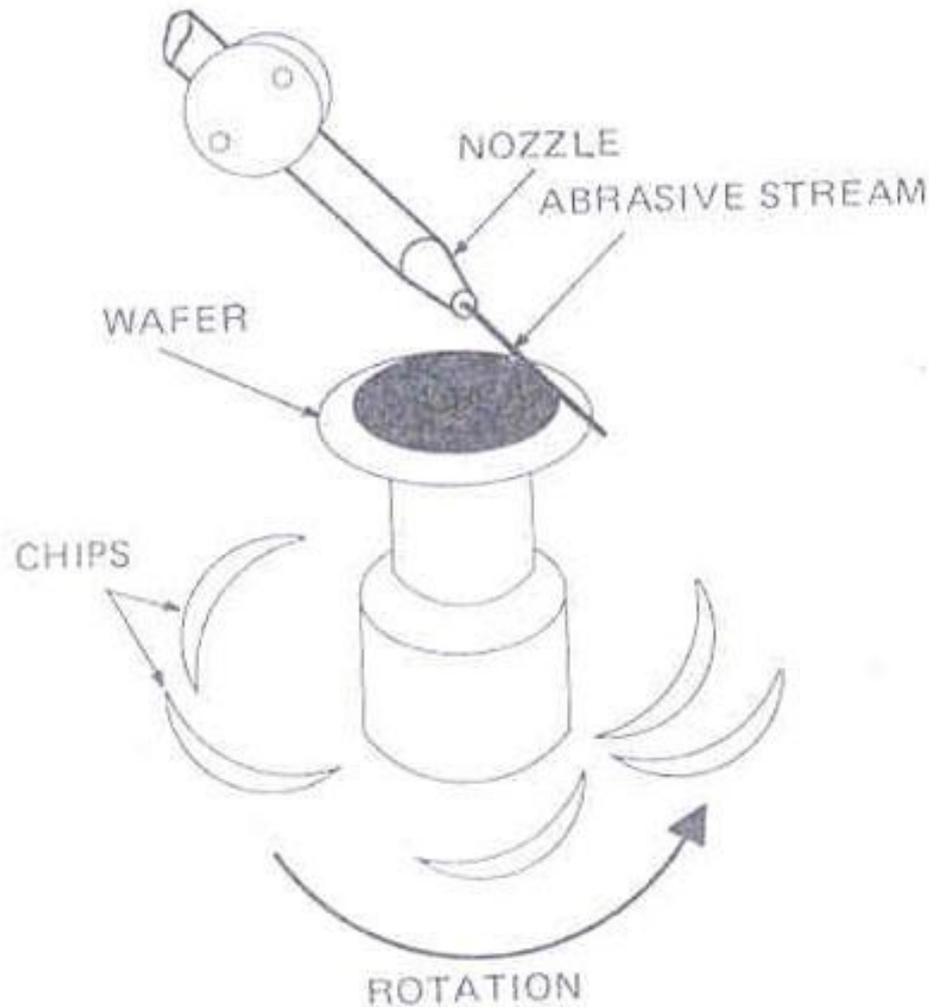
Technique used for AJM-trimming of silicon/tungsten disks.
